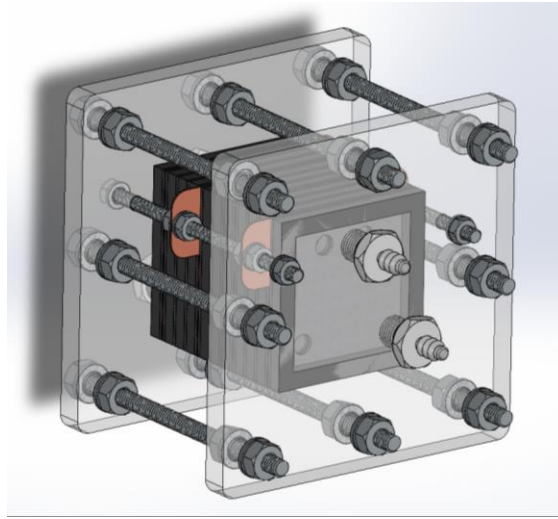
9: Isometric Elevation of the assembly of the HHO Generator unit
